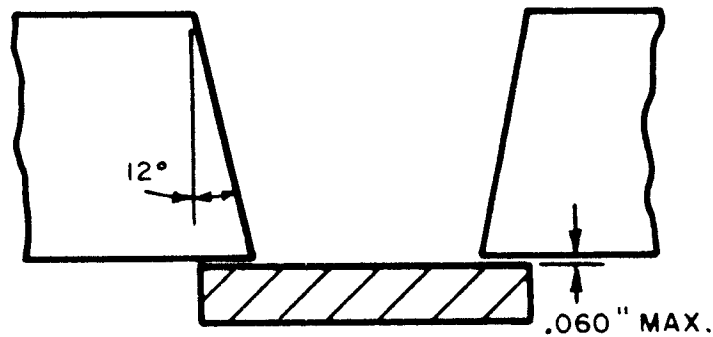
Weld preparation for full penetration welds (26).
